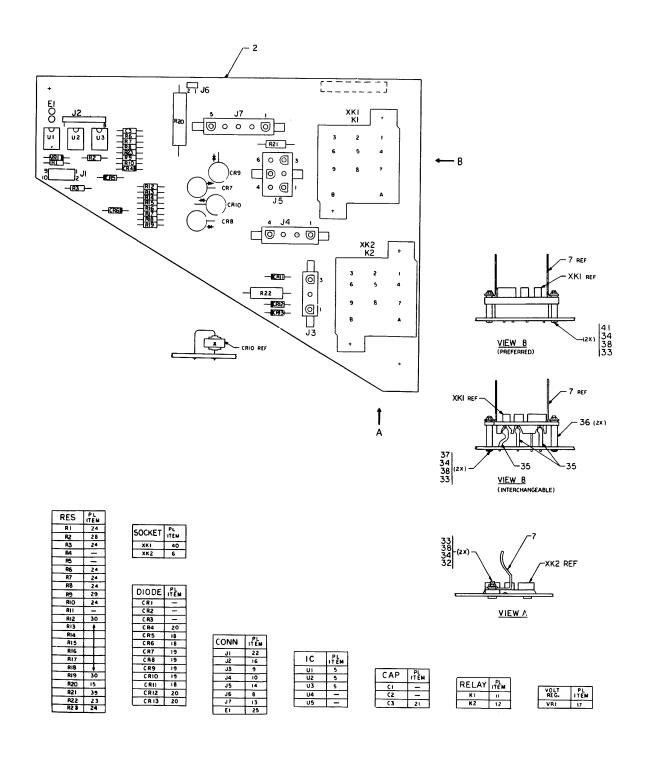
RELAY CONTROL CIRCUIT BOARD (SHEET 4 OF 6) (ASSEMBLY 77680650, NO AIR)
